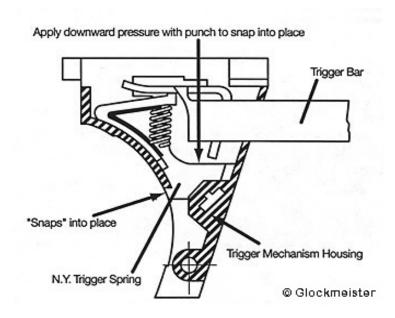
Before installing the New York Trigger Spring, be sure that the connector fits tightly in the Trigger Mechanism Housing. If the Connector does not fit tightly - you will need to replace the Trigger Mechanism Housing to ensure a tight fit for the connector.
